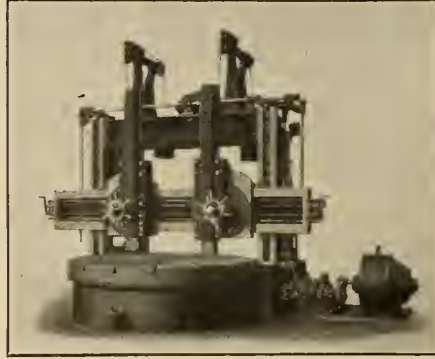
104" Boring Mill at Berlin Machine Works.
